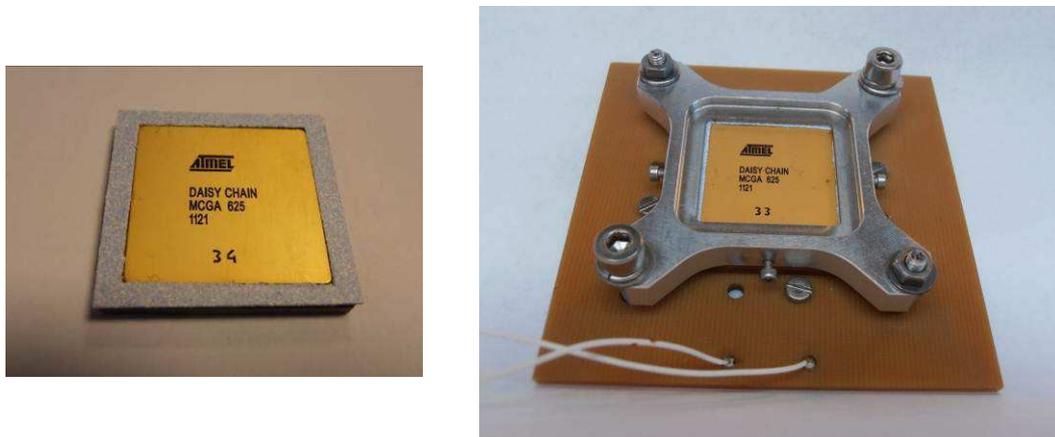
Thermal seal mounted on the top of the LGA (left) and final assembly (right)
